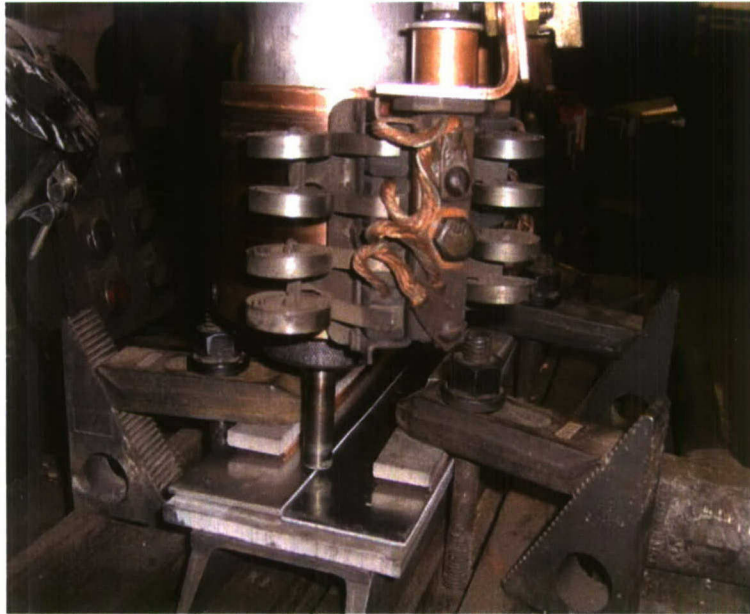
Mill Spindle with Slip Ring and Brush Assembly, Weld Tip is in Working Position.
